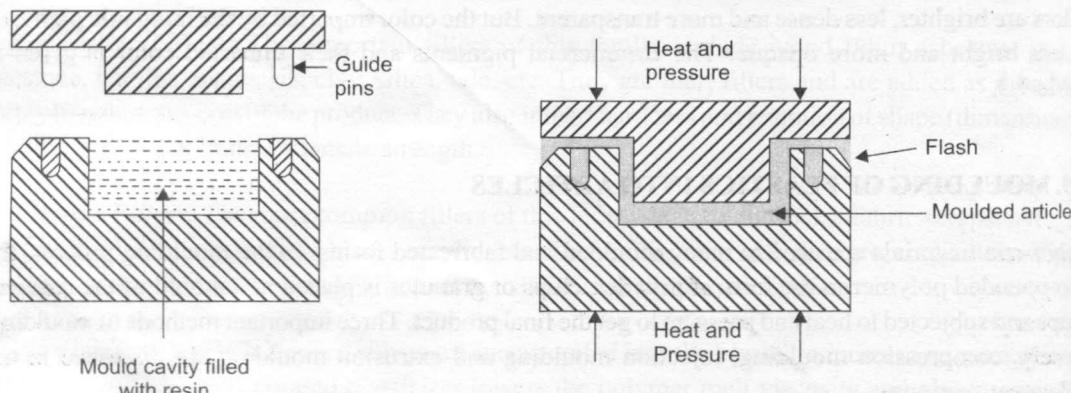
Schematic diagram of a mould employed for compression moulding
